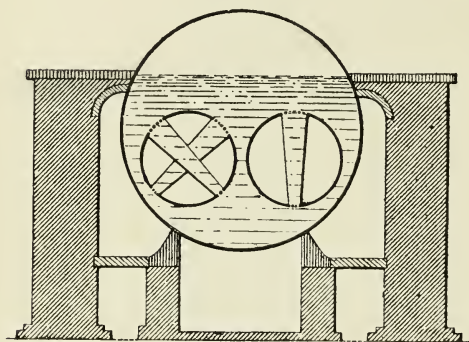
LANCASHIRE BOILER WITH GALLOWAY TUBES.
